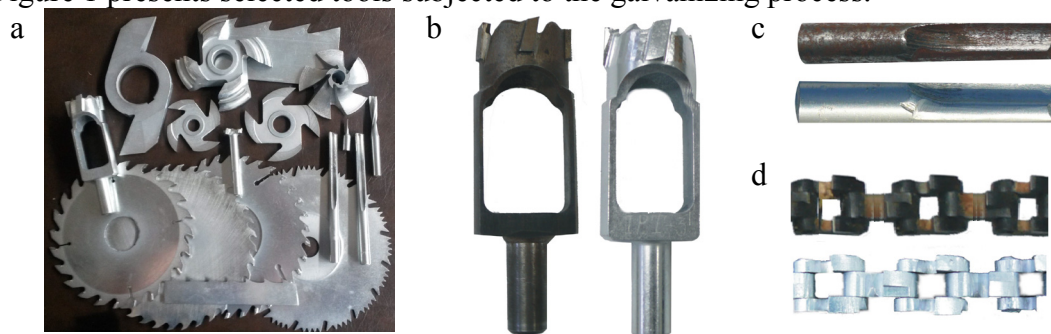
Tools subjected to galvanizing process; a – tools exhibits after galvanizing; b, c, d - selected tools before and after galvanizing: cylindrical drill, shank cutter, mortising chain
